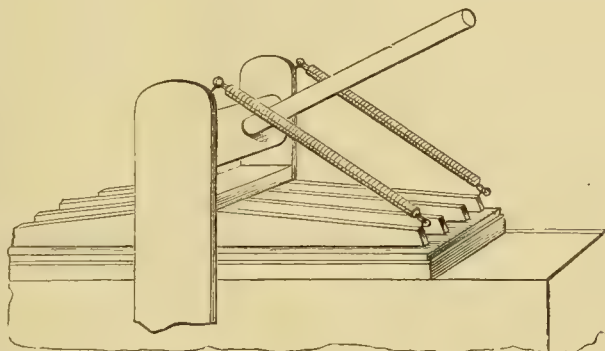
DIAGRAM SHOWING PLATEN OF PRESS SHUT AND THE SPRINGS IN POSITION.
